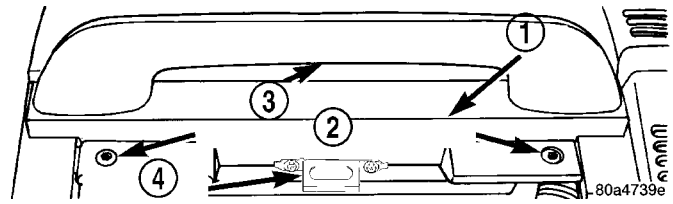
GRAB HANDLE BEZEL REMOVE/INSTALL
